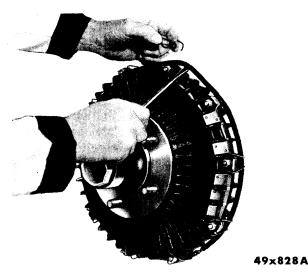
Removal and Installation of Dampener Springs and Clips (Front Disc Brake)
